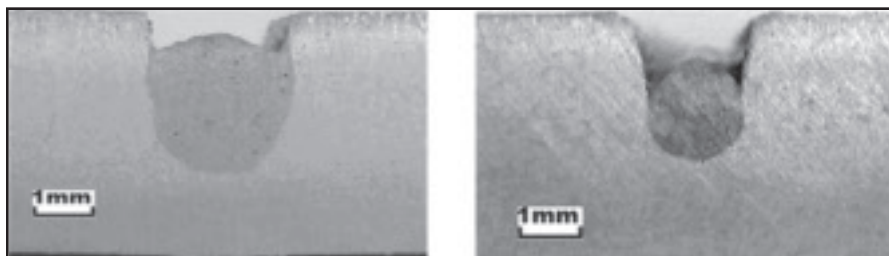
Welding cross section of GMAW (left) and DB-GMAW (right) under same welding conditions.
